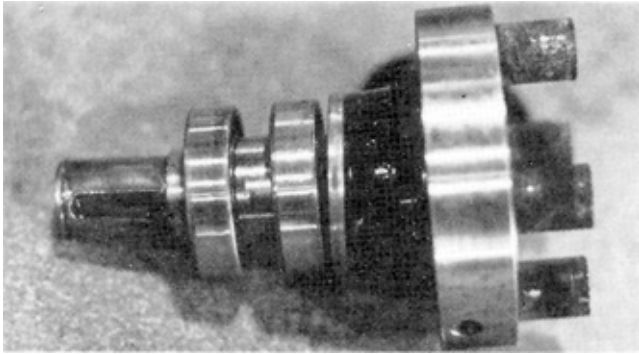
Bent Shaft and Worn Keyway in Flushing Unit Distributor.
